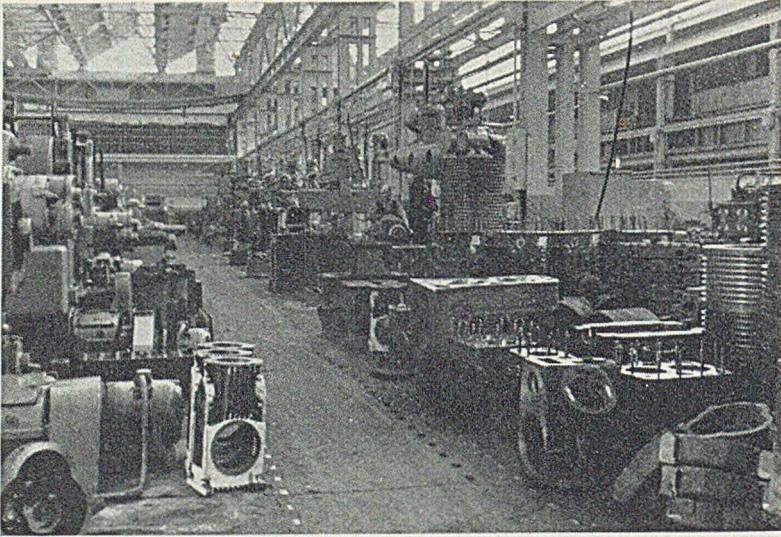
PART OF THE MACHINE SHOP SHOWING A GROUP OF TYPICAL FINISHED-MACHINED CASTINGS.
